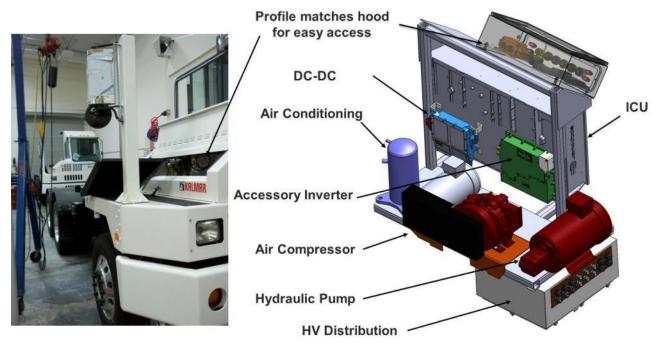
Drawing showing pre-assembly of ICU and accessory components.
